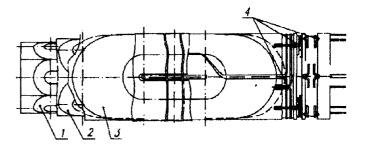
Top view of the winding package. 1—sextupole coil, 2—quadrupole coil, 3—dipole coil, 4—current leads
